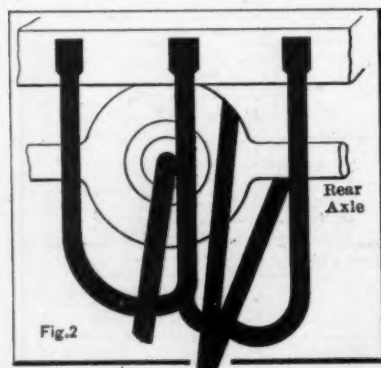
Support to prevent propeller shaft and torque rod from dropping
